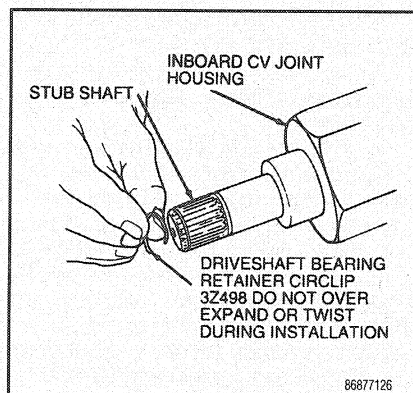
Always use a new circlip on the inboard CV-joint stub shaft and/or link shaft. When installing the new circlip, start one end in the groove and work the circlip over the stub shaft end into the groove. This will avoid overexpanding the circlip
